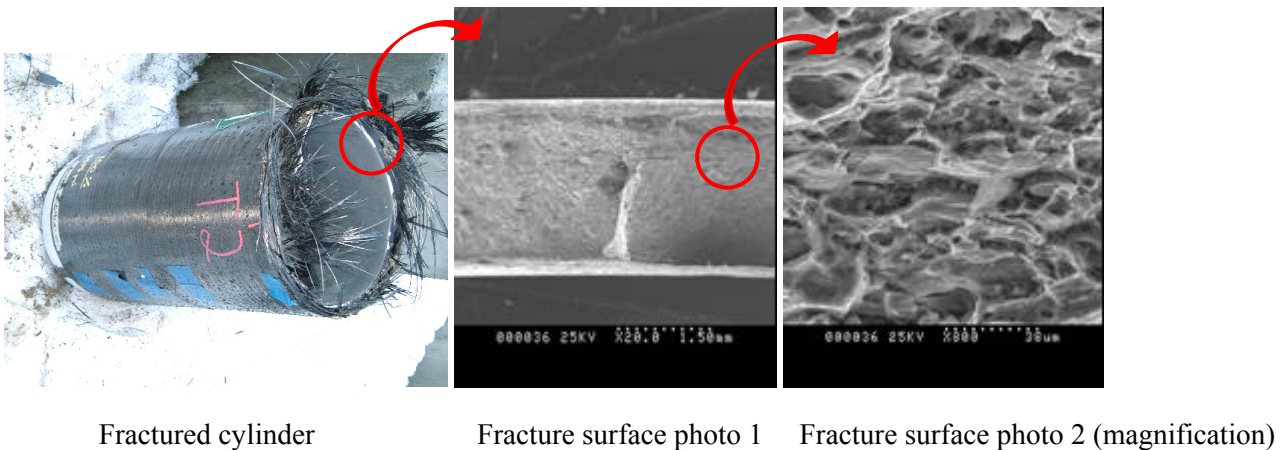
Fractured surface of burst cylinder (T-2: Type-3a, Axial, Disp. 138 mm, 35 MPa).
